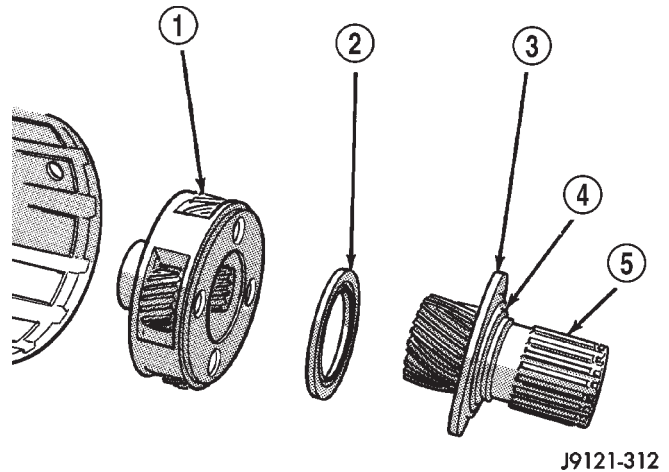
Removing Sun Gear, Thrust Bearing And Planetary Gear
